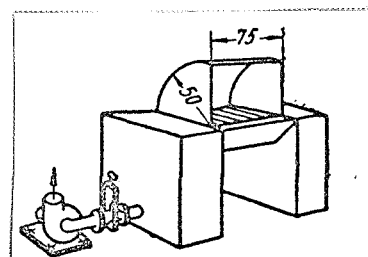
Special bench for welding with portable shelter and under-the-grid suction.
